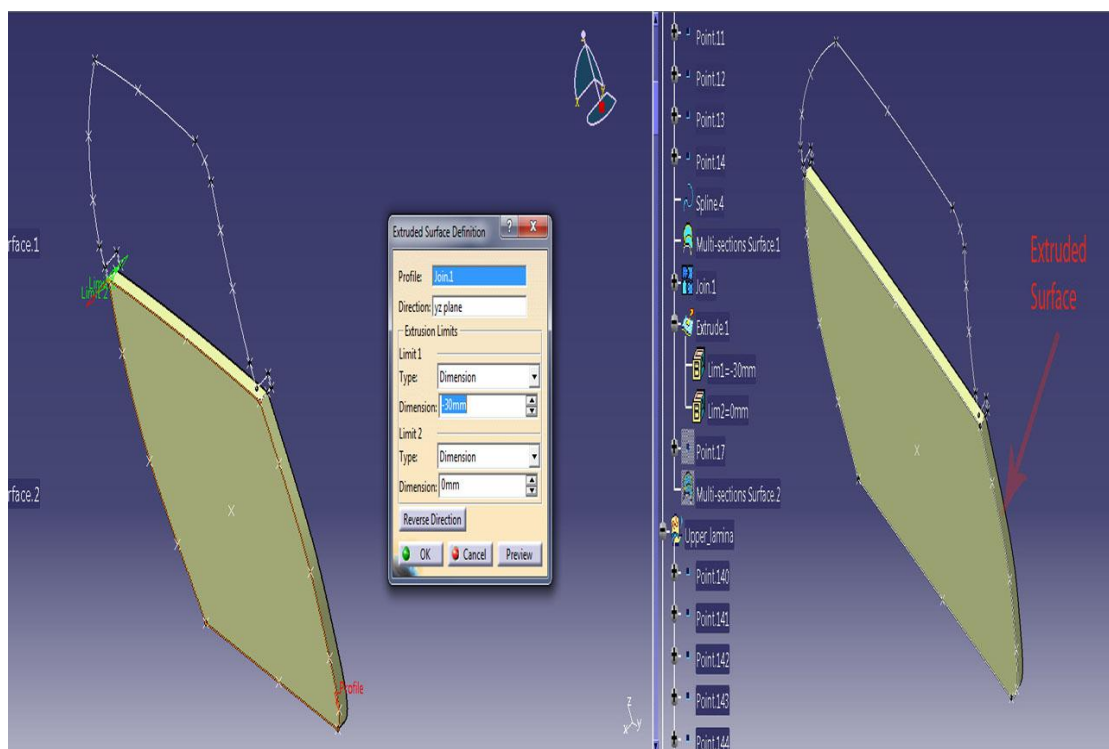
Part of door panel wireframe section that constitutes the base for the adjustment of the glass window frame.
